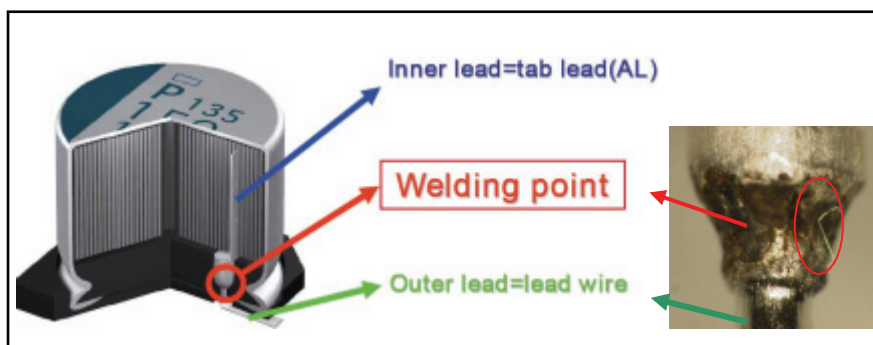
Position of welding joint on SMD AL-Capacitor (ACEA et al. 2009b)
